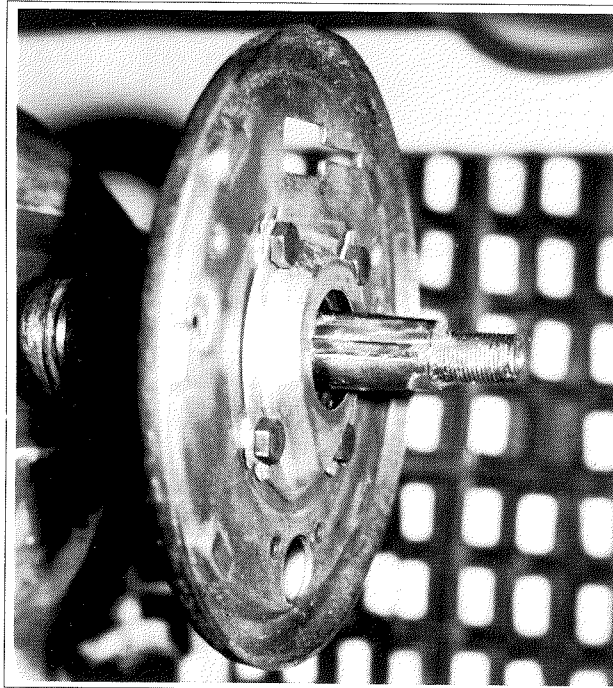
Fit a new oil seal into the seal housing such that the retaining spring is visible.
